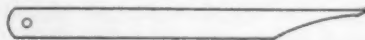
An illustration of the unsoldering aid suggested by W7JJP. The tool is made from a hacksaw blade.
